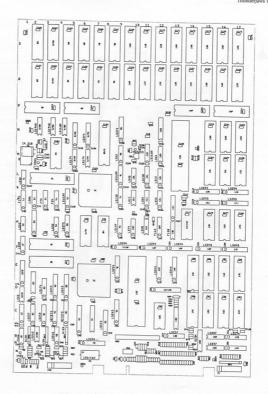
ThunderJaws Game PCB Assembly A047364-01 D
